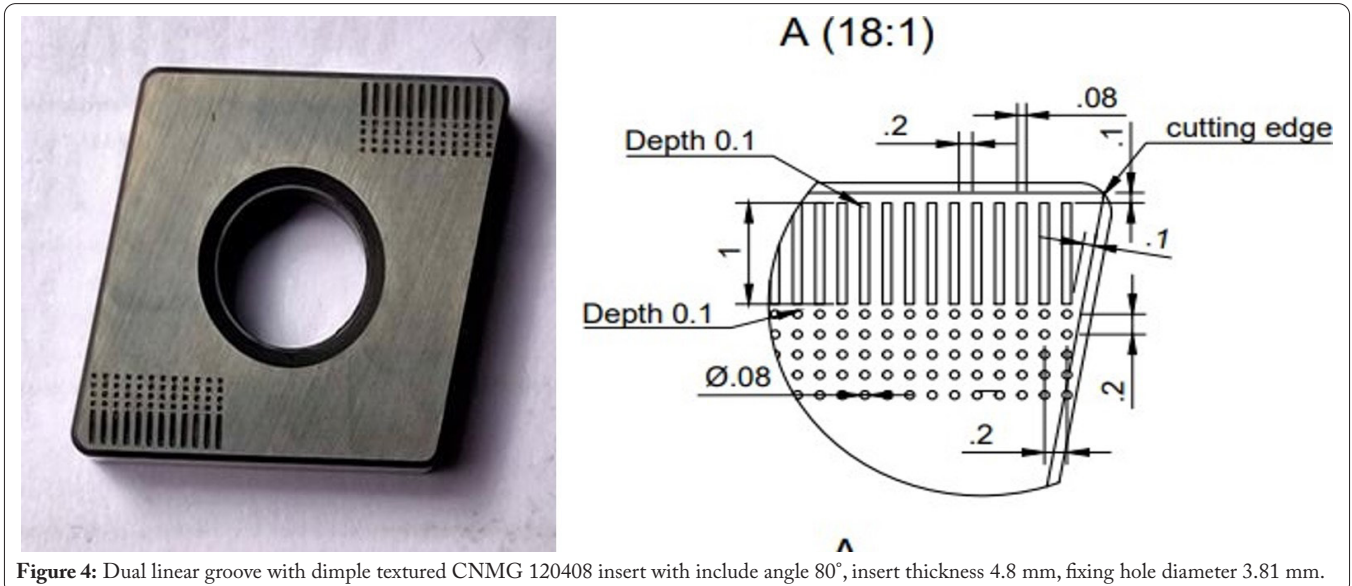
Dual linear groove with dimple textured CNMG 120408 insert with include angle 80°, insert thickness 4.8 mm, fixing hole diameter 3.81 mm.
